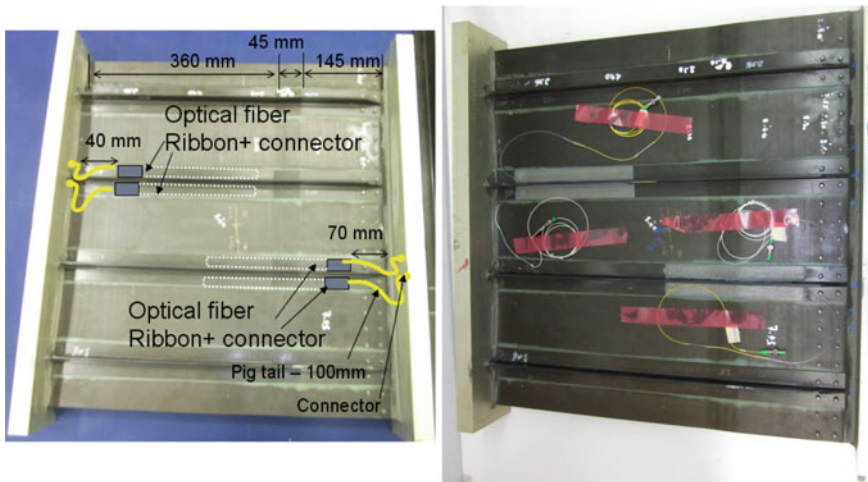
Panel with four T stringers equipped with 4 ribbon tapes
